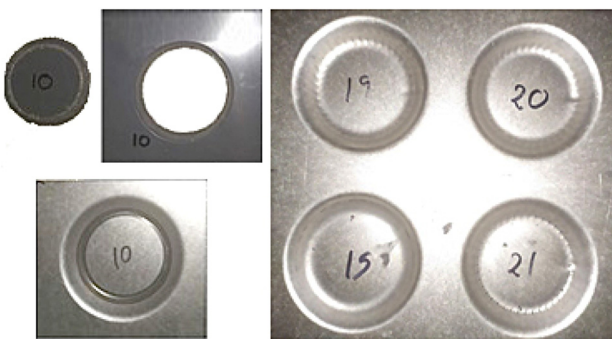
Molds manufactured during the experimental stage: damaged mold: the tool breaks the dummy sheet and removes the aluminum coating (food contact is lost) (left); correct molds: the dummy sheet does its job and protects the aluminum coating (possible food contact) (right).
